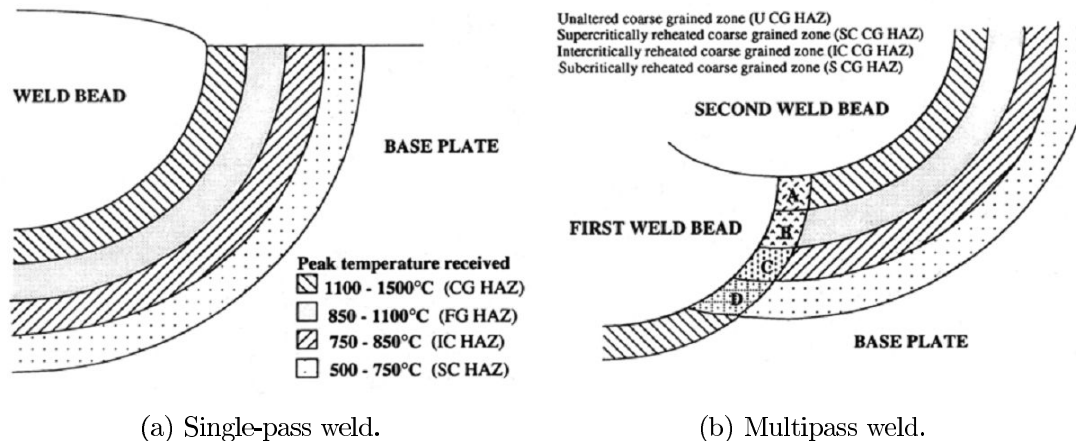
The heat affected zone of (a) single-pass weld and (b) multipass weld. Taken from [9, p. 564].
